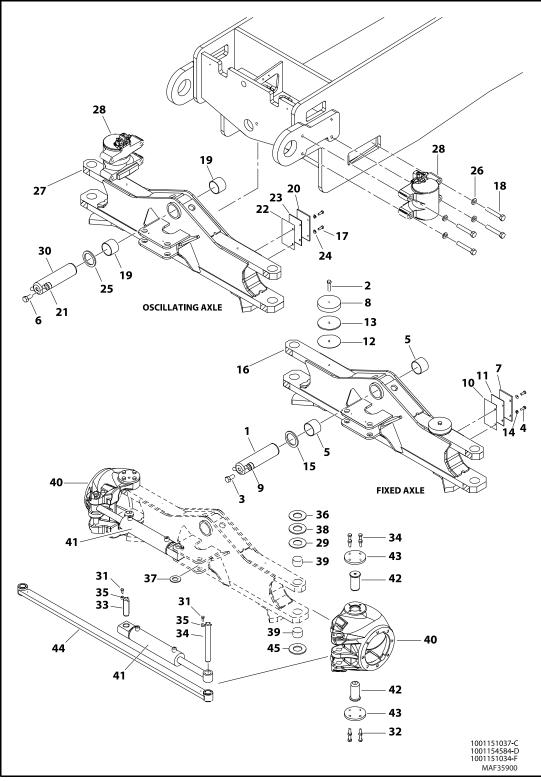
Axle and Steering Installation without Tow Package- Sheet 1 of 2
